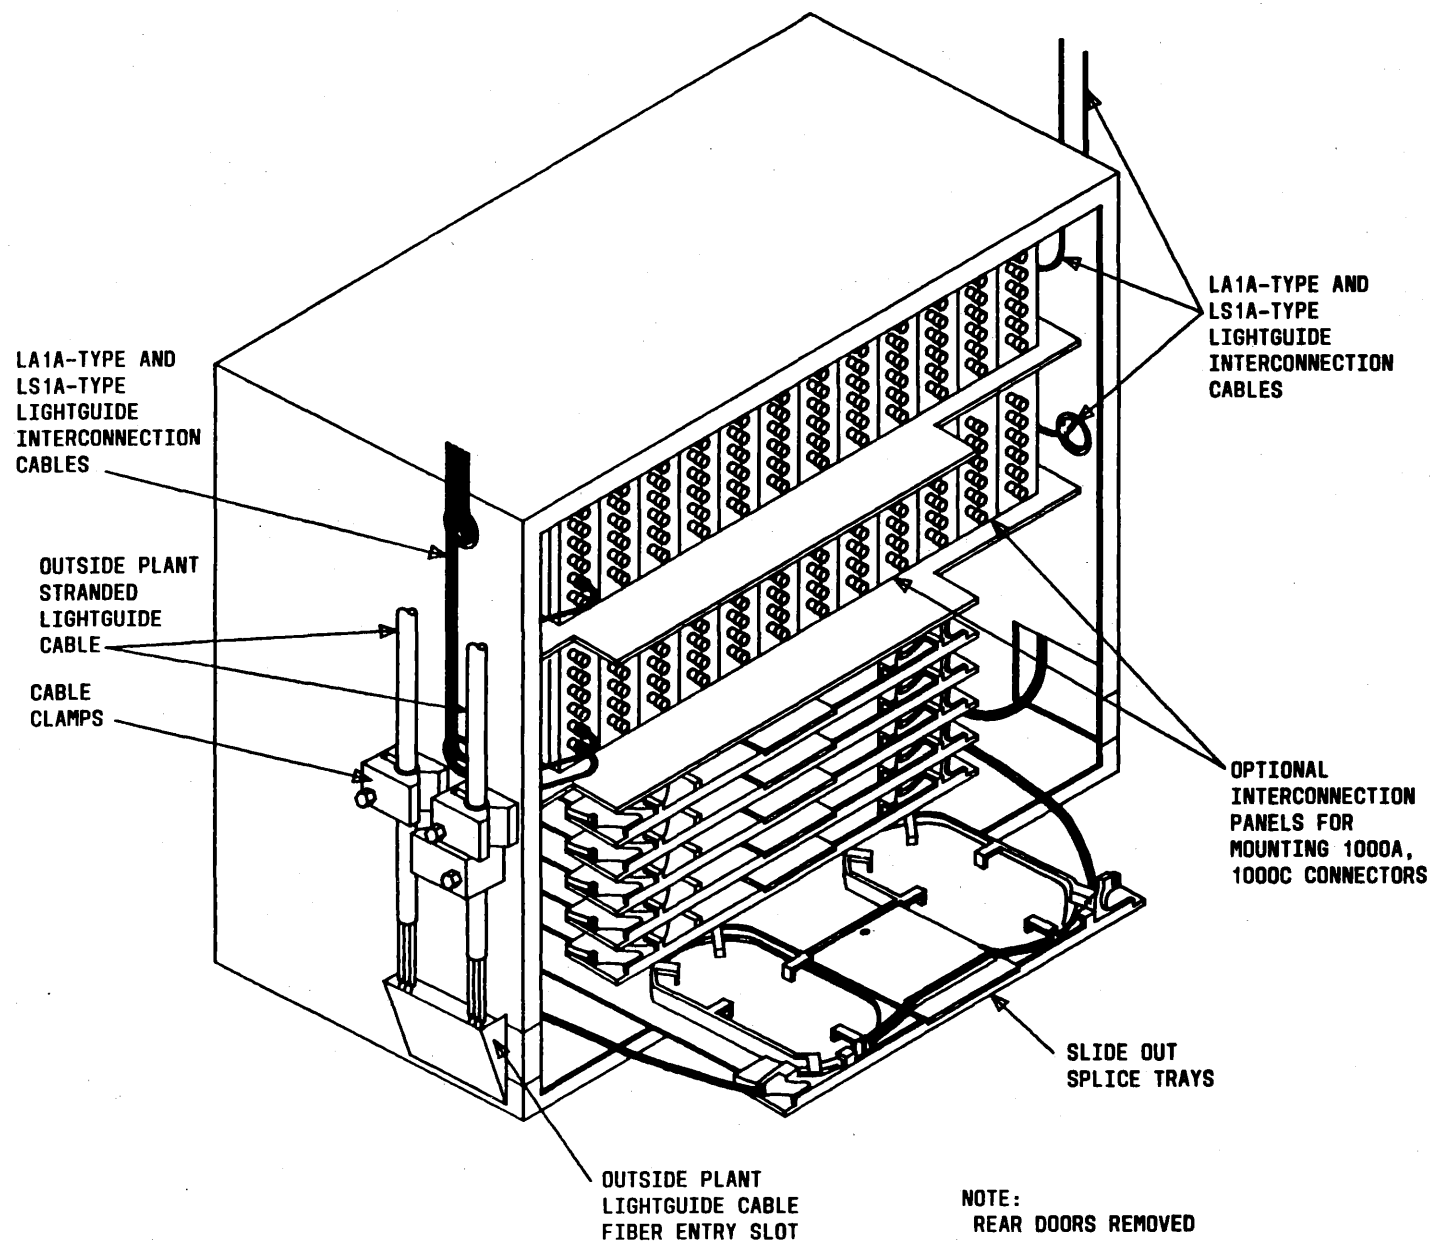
Typical Installation of Lightguide Stranded Cable Interconnection Equipment (LSCIE) Rear View
